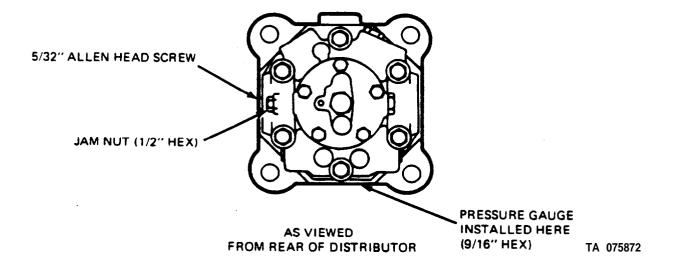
Hydraulic Motor Pressure Adjustment.
